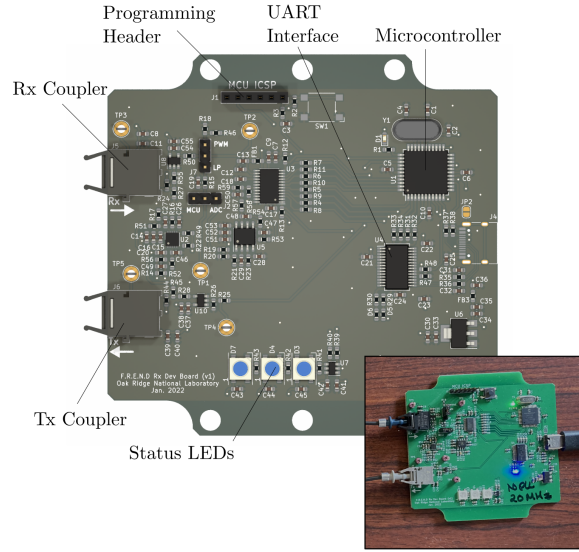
Optical receiver circuit board with inset photo of the assembled prototype.
